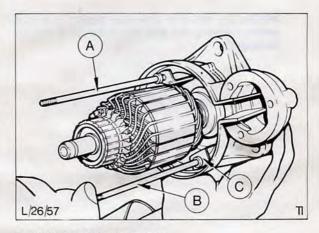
A and B – Fixing studs C – Clutch stop bracket
